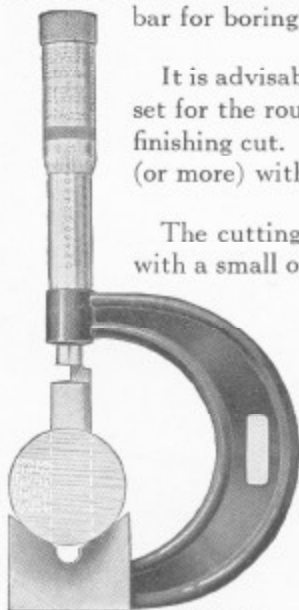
Special V-block micrometer for adjusting bar cutter bit.
